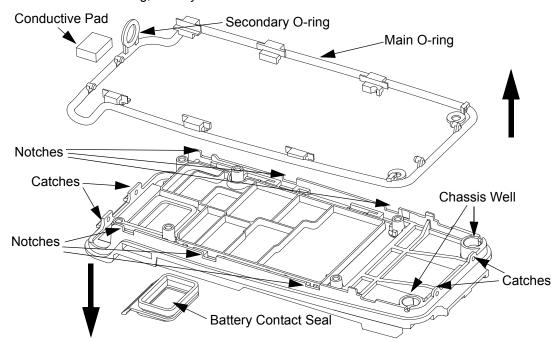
O-ring, Battery Contact Seal and Conductive Pad removal.
